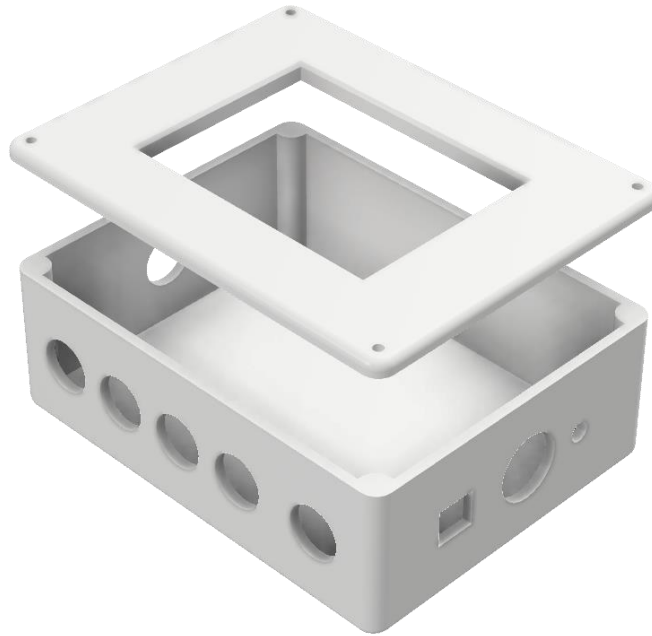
Exploded 3D CAD view of the cuff controller frame.
